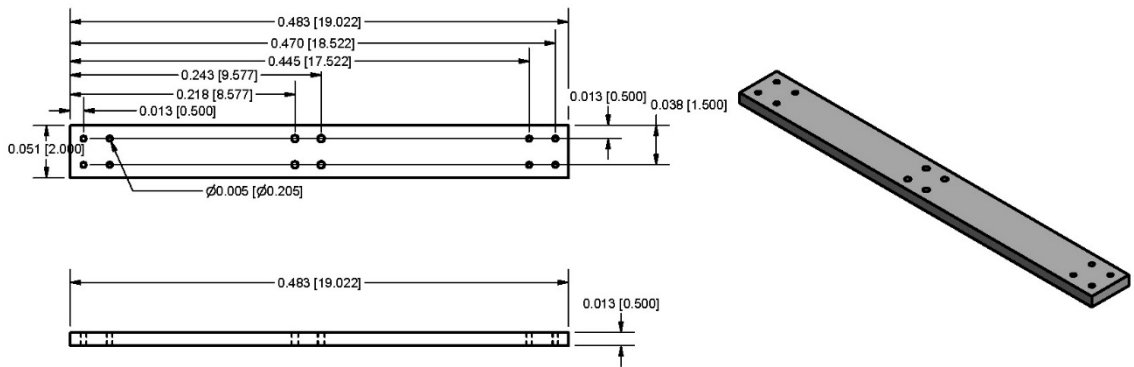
Brace on one end of the top assembly to join two linear rails together.
